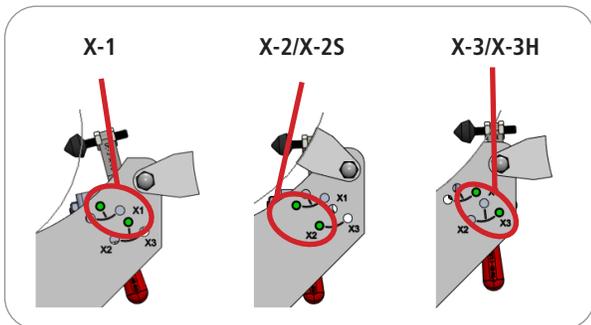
Clamp Bracket Assembly Bolt Holes locations
